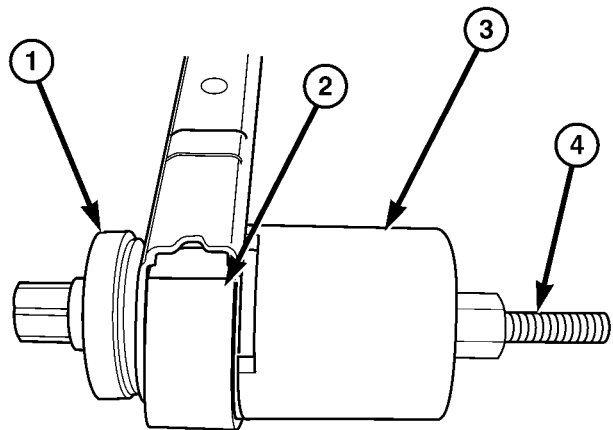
UPPER SUSPENSION ARM BUSHING - REMOVAL
